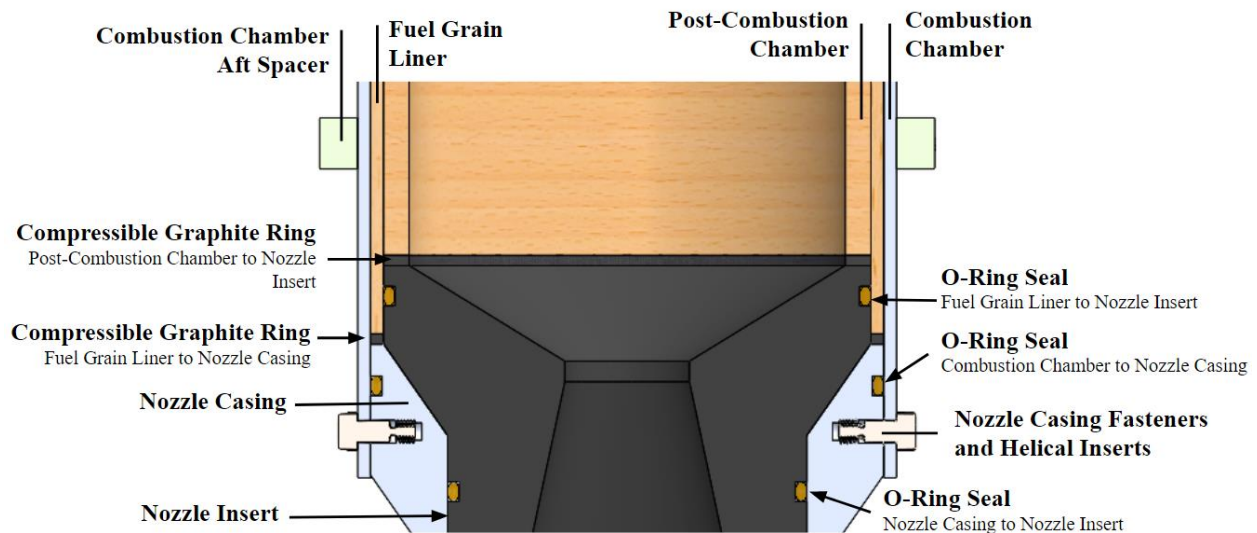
Nozzle Assembly and Combustion Chamber Assembly Integration (cross-section view)
